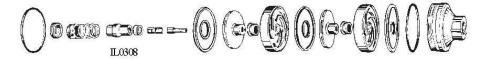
Cartridge Assembly Includes Discharge Bearing, Shaft & Coupling Assembly, Diffuser Plate, Impellers, Diffuser Bearings, Diffusers and O-rings
